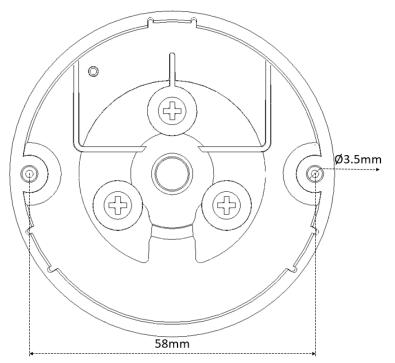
Modbus CO2 Sensor Mounting Holes – Swivel Mount
